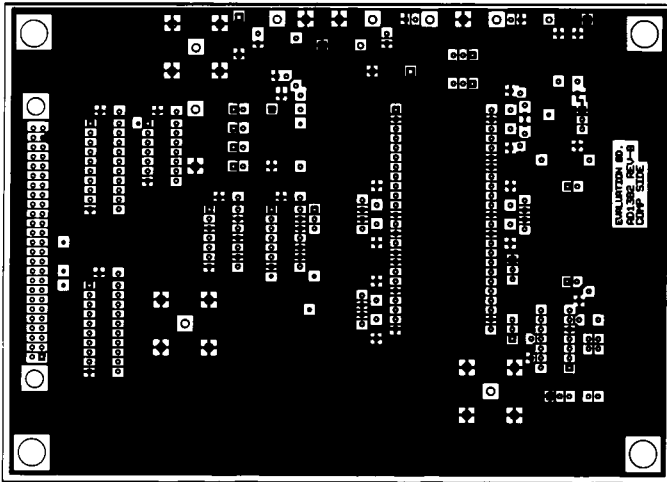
AD1382 Evaluation Board Layout, Layer 1 (Component Side)
